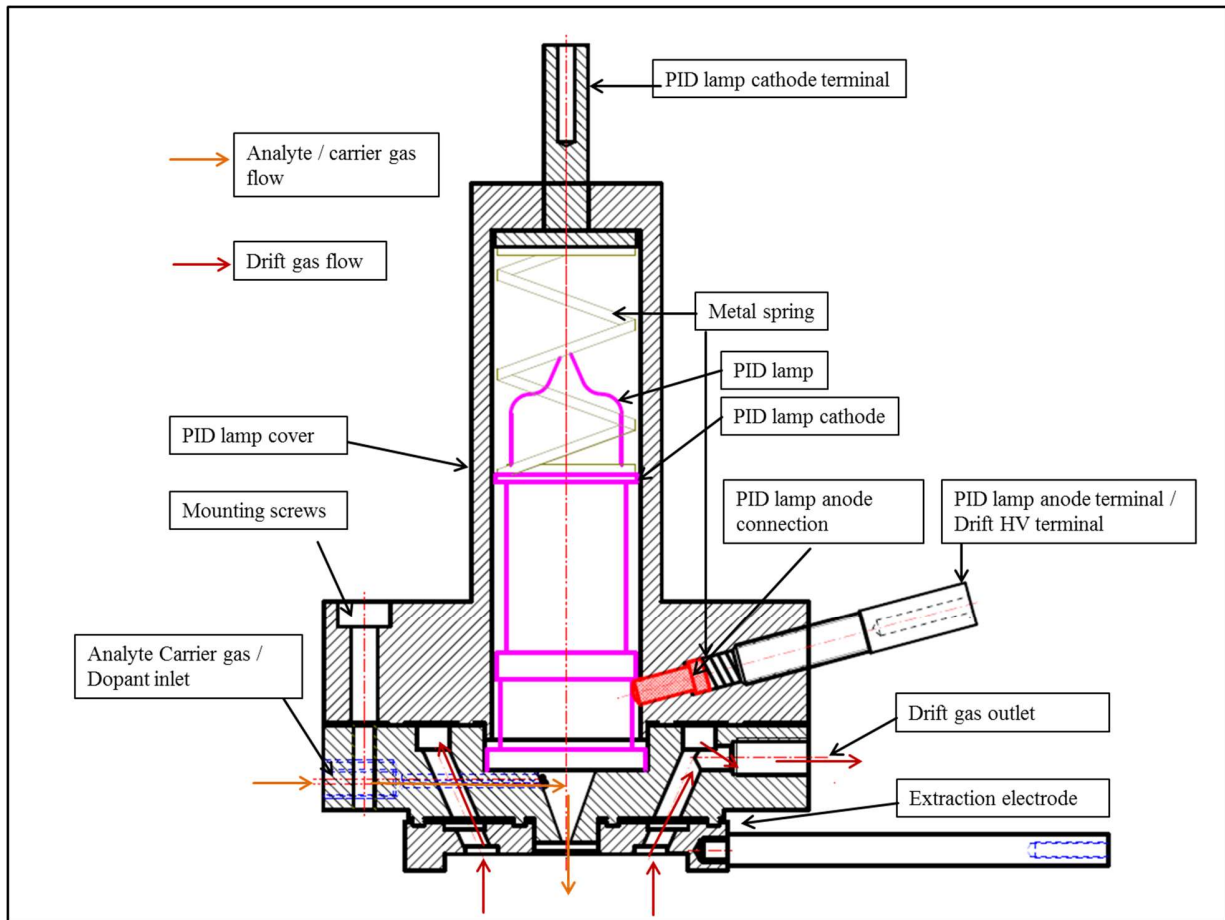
Technical drawing of the photoionization source assembly side view. Printed with the permission of the mechanical workshop TGM University Duisburg-Essen
